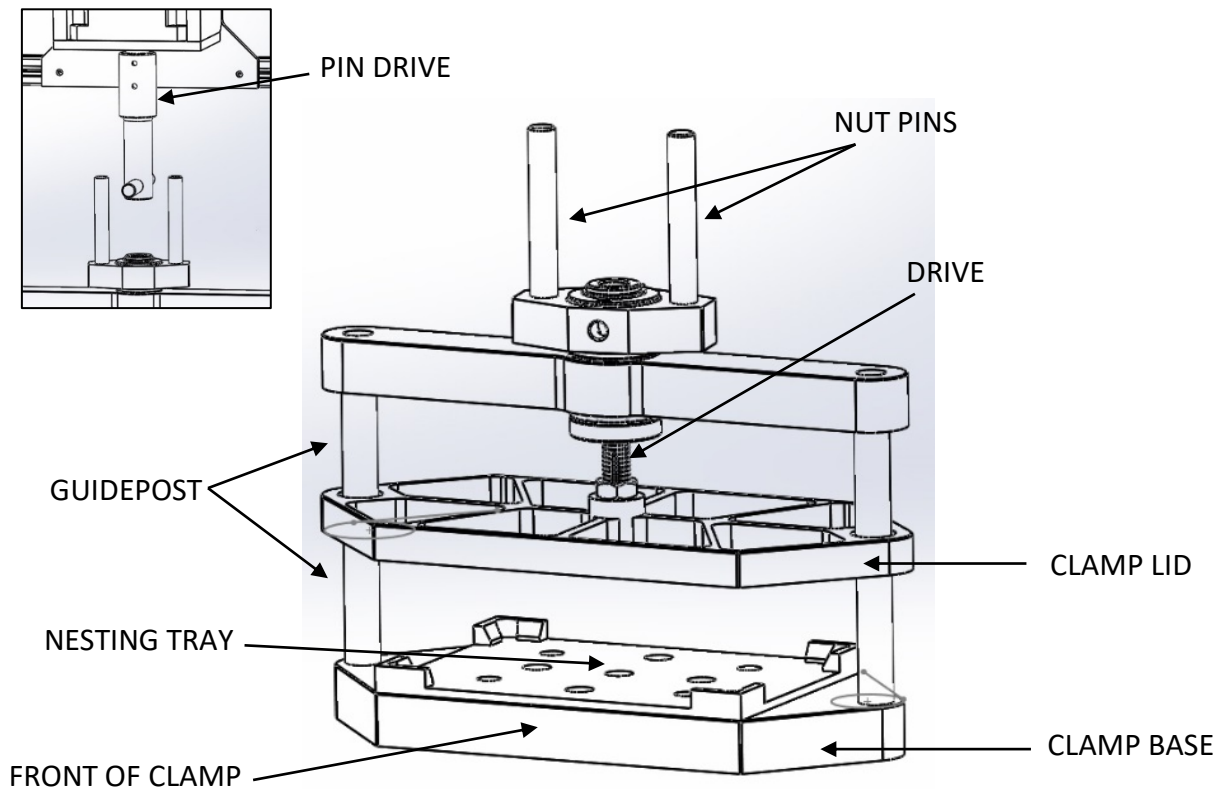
HG-800 Geno/Grinder, Clamp Mechanism
